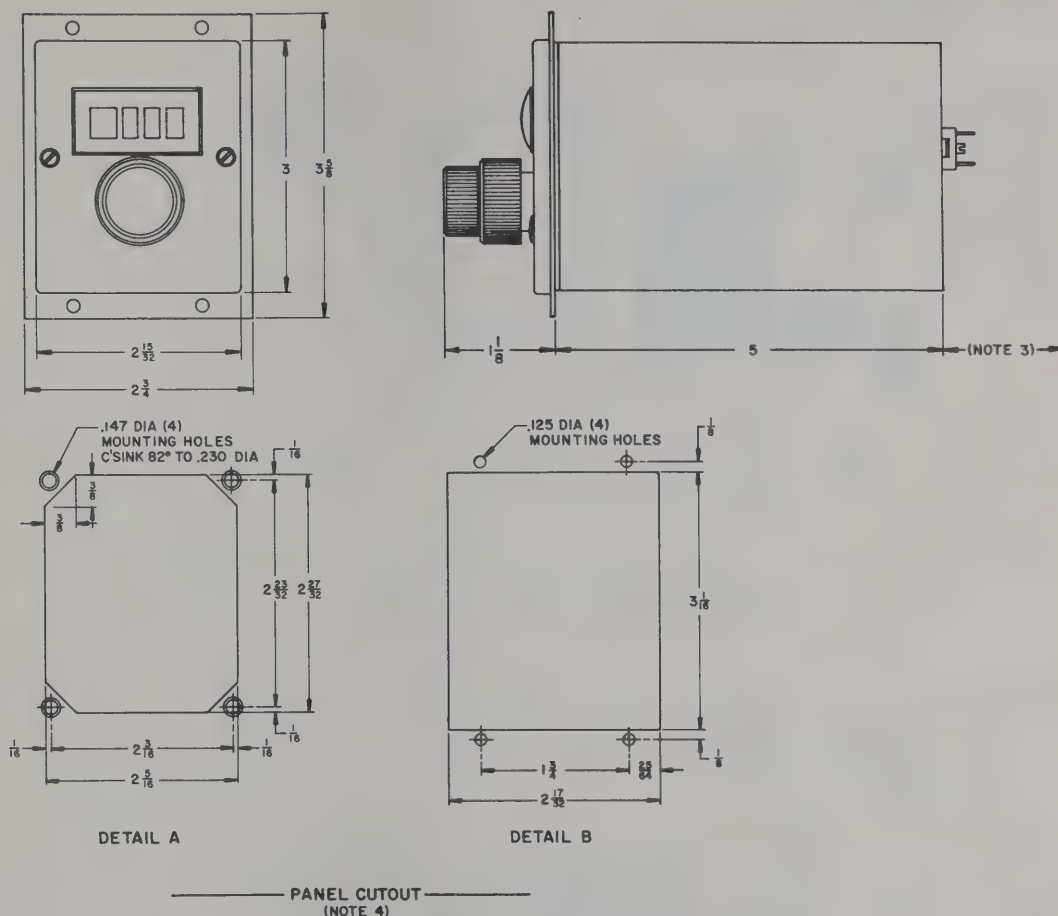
RTA-831A Accessory Unit with Mounting 34980, Installation Dimensions
